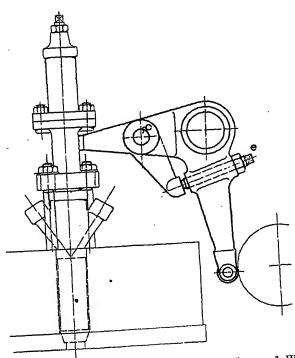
Fuel Injection Valve Actuating Lever (Laugen & Wolf).
